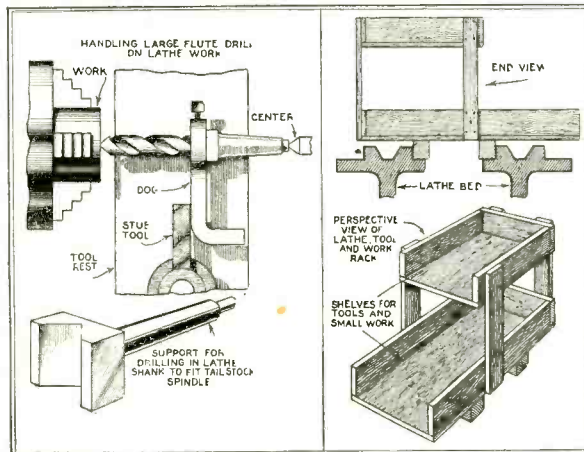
Left—The dog holds the drill which is fed by means of a stock spindle. Below—Using a V support. Right—This sliding rack for tools will protect the lathe.
